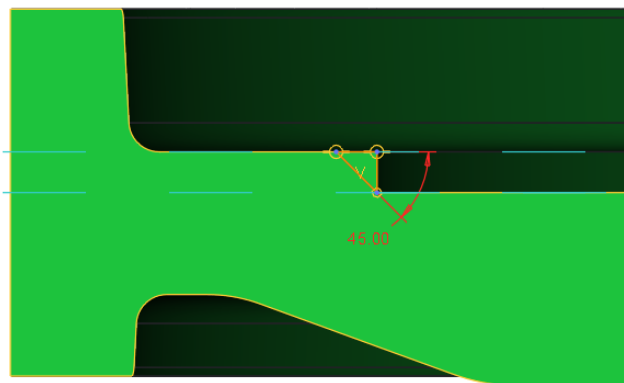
Failing chamfer replaced with a revolve feature constrained to the surfaces and the lower edge instead of the upper edge as an actual chamfer feature.
